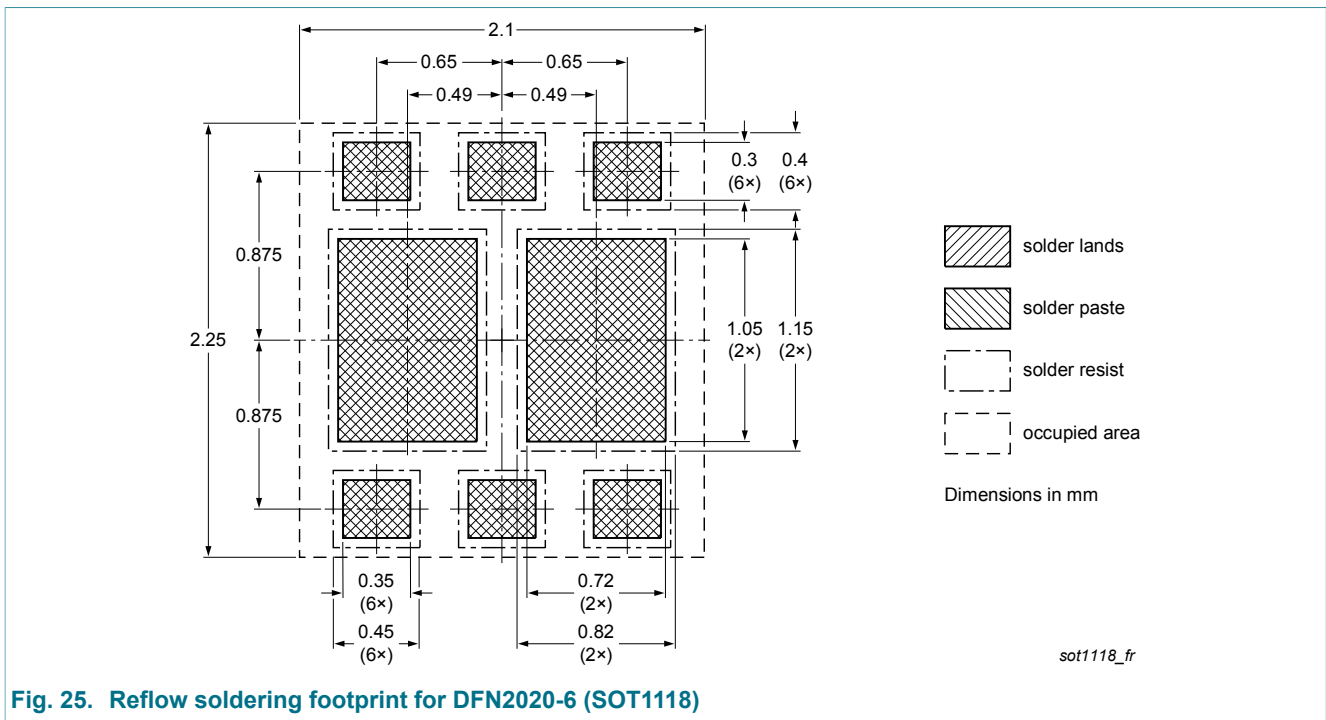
Reflow soldering footprint for DFN2020-6 (SOT1118)
